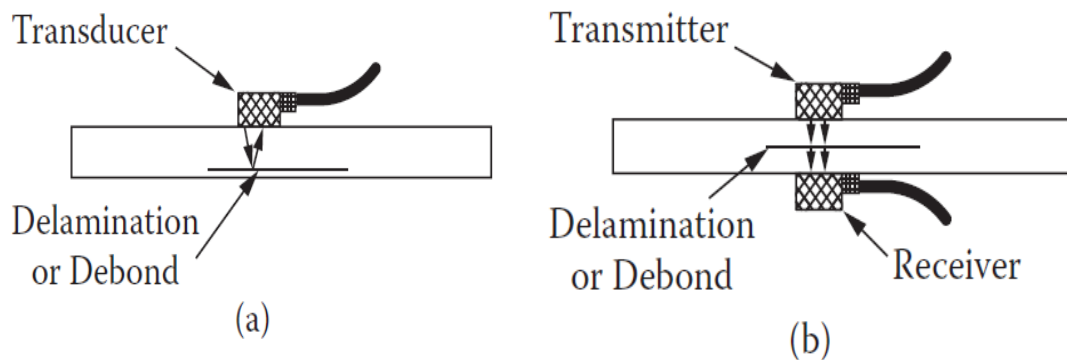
3. Ultrasonic Inspection Techniques, a- A-Scan, b- C-Scan [10].
